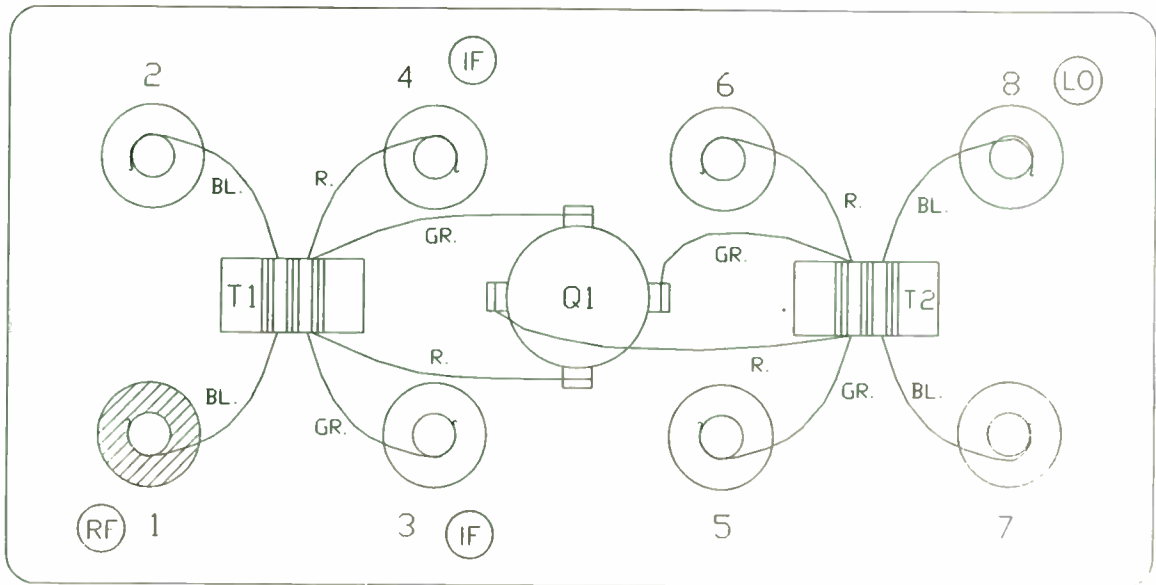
Typical assembly of a double balanced mixer using conventional technique.
